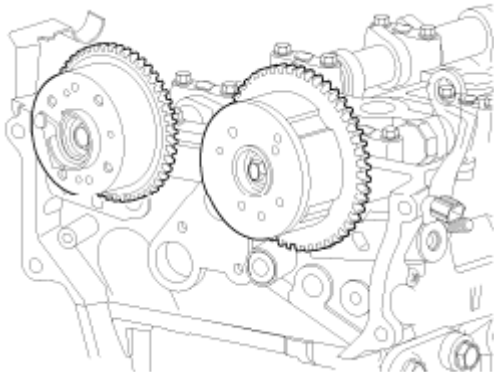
Identifying Intake And Exhaust CVVT Assembly
